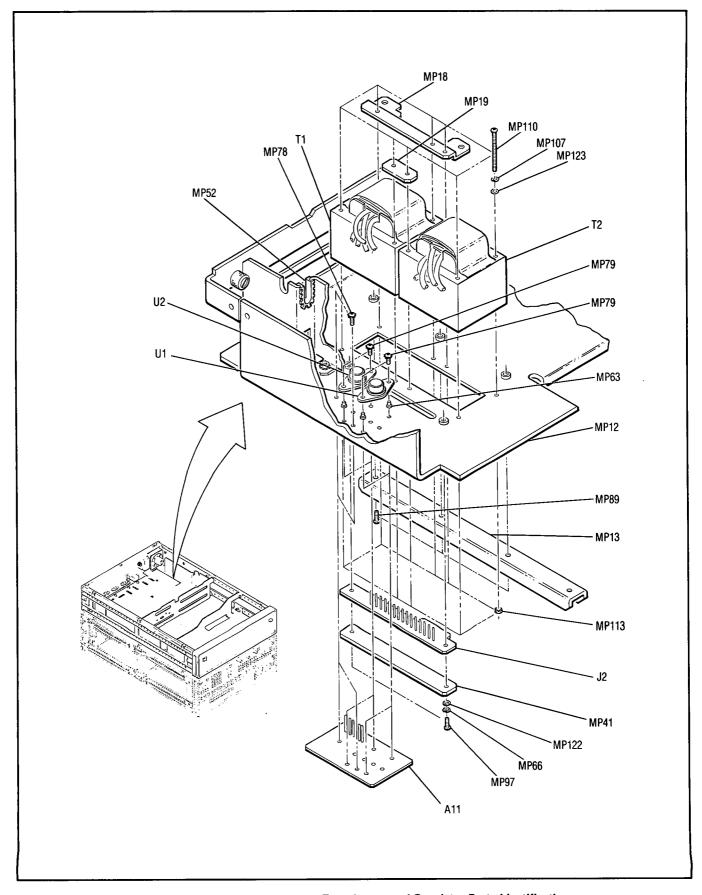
Lower Unit Power Transformer and Regulator Parts Identification
